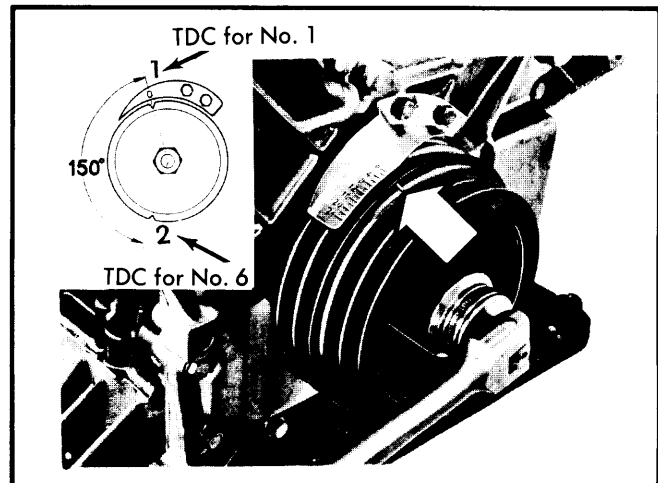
Adjusting Crankshaft to Firing Position for No. 1 Cylinder
